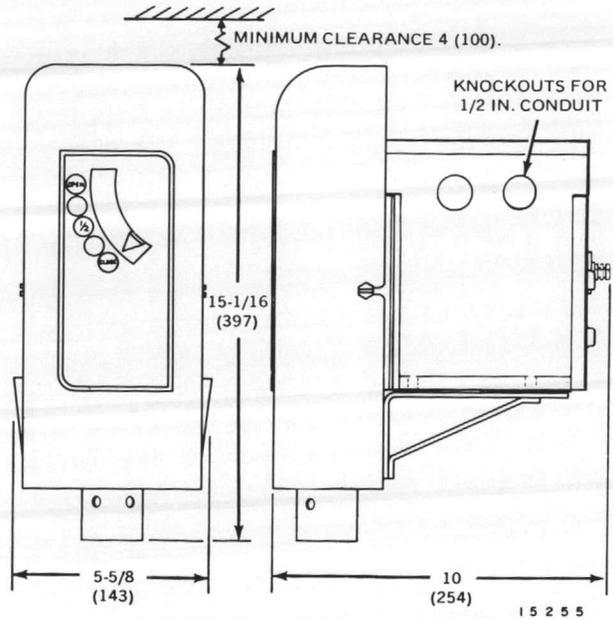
Typical Electric/Electronic Actuator with Q601 Linkage Approximate Dimensions in Inches (Millimeters). M644 Shown.
